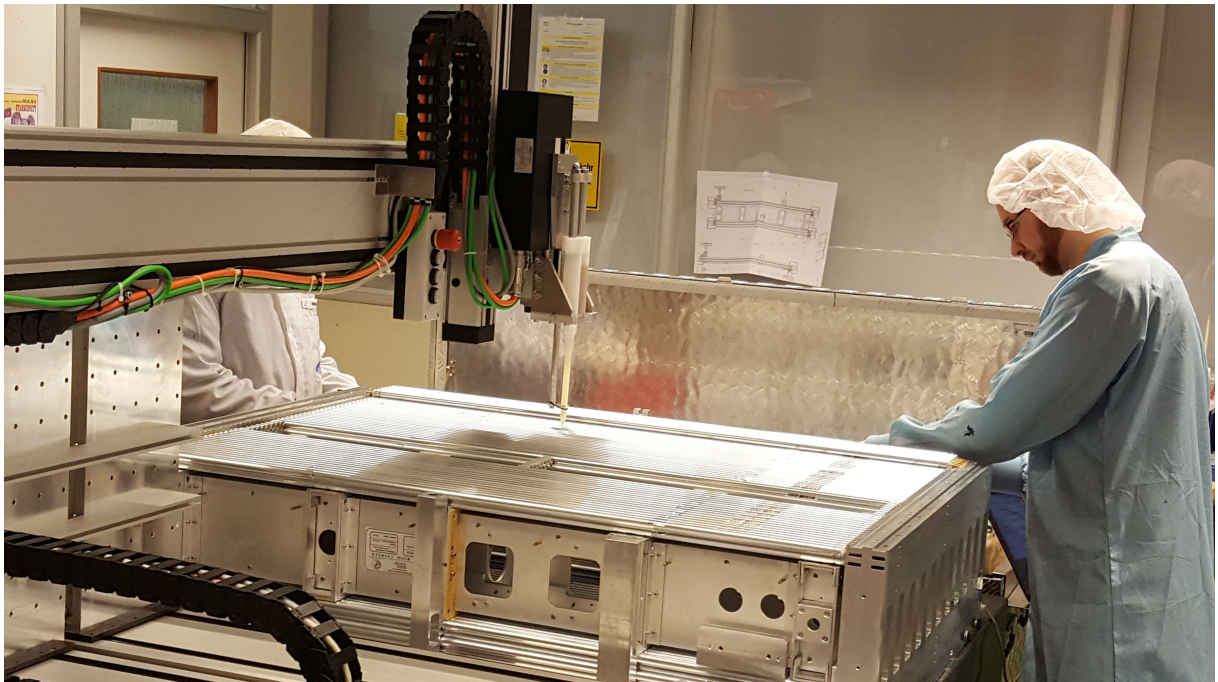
Glue distribution between adjacent tubes of a tube layer during BMG chamber assembly (second multilayer) using an automated glue dispenser.
